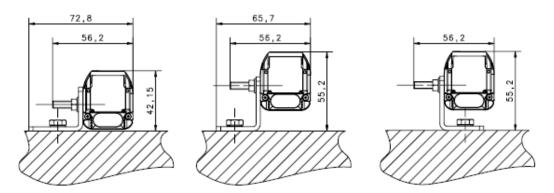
Accessories - order separately, L-shaped mounting brackets
